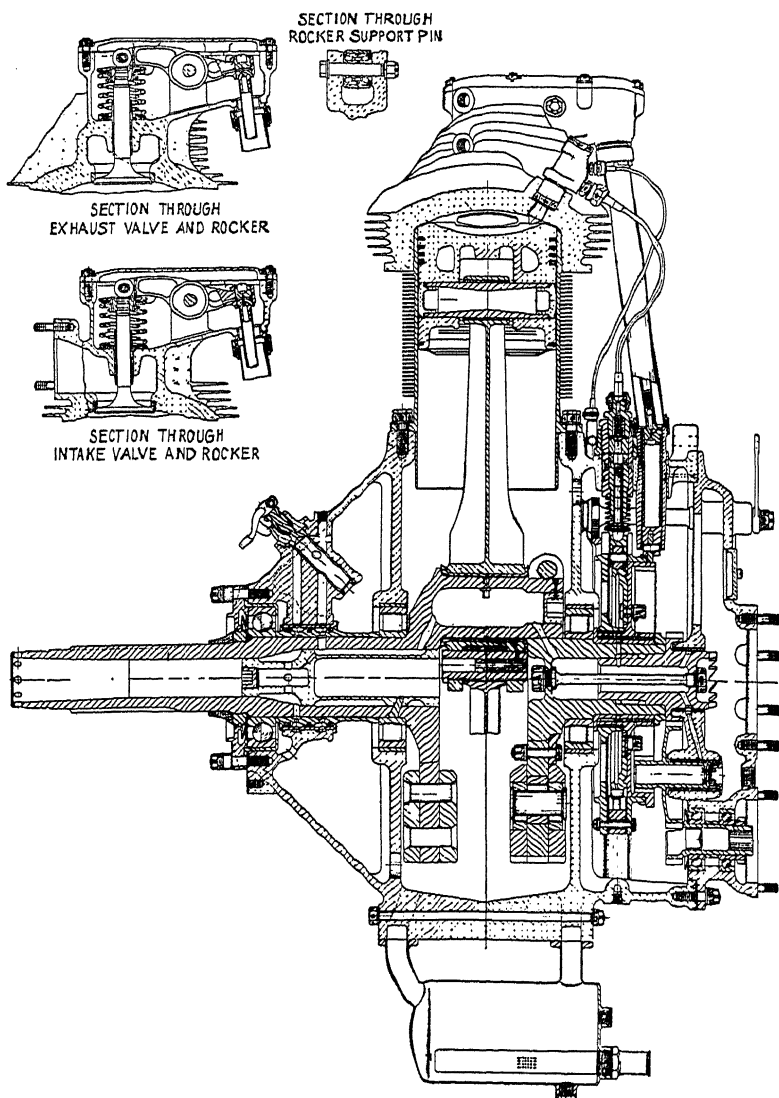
Sectional view of the Guiberson compression ignition engine.
